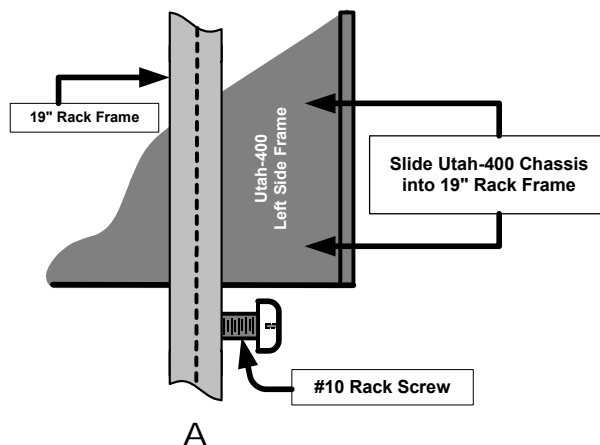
Sliding the Utah-400 Chassis into Rack Frame
